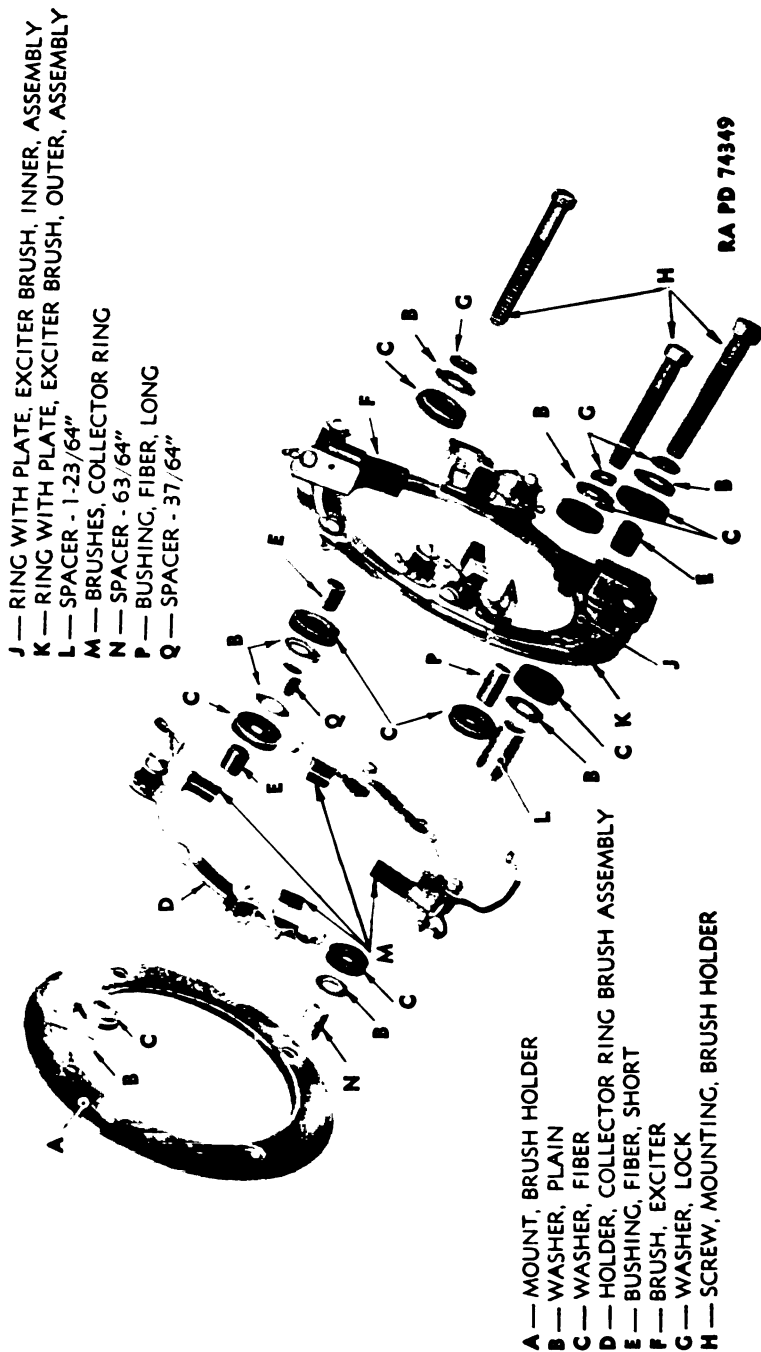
Brush-holder Ring Assembly (H. B. Co. Unit) — Exploded View
